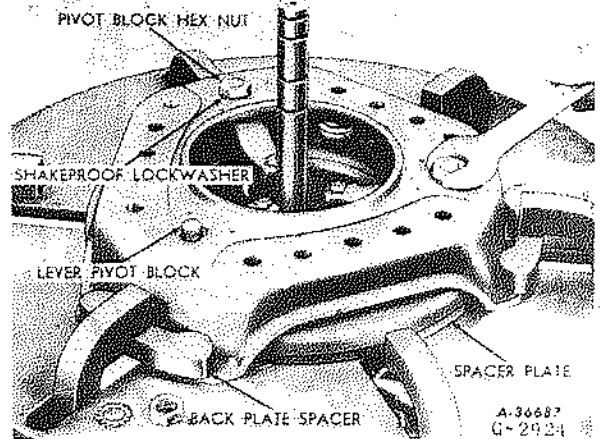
Securing clutch assembly in overhaul fixture (SE-990)
